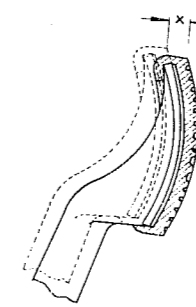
Free-play at the brake pedal "X" should be 5-7mm. (0.2-0.28 in.).
